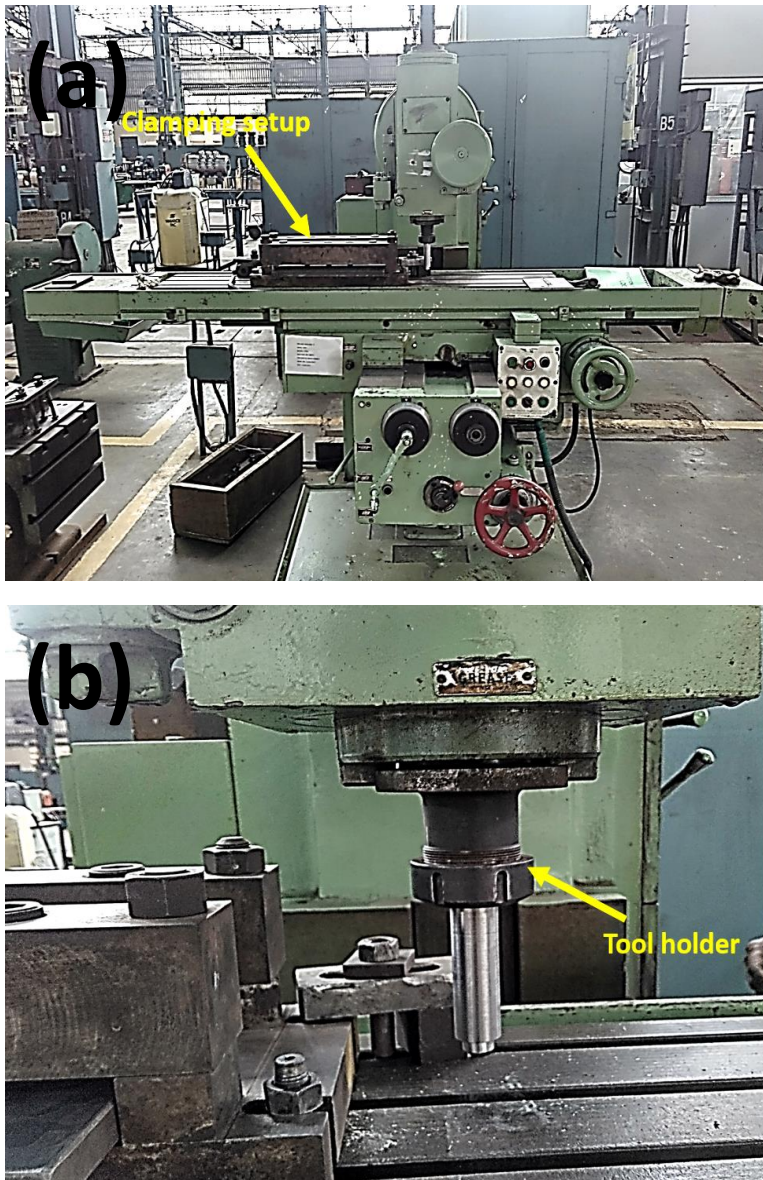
(a) FSW equipment and (b) Tool holder
